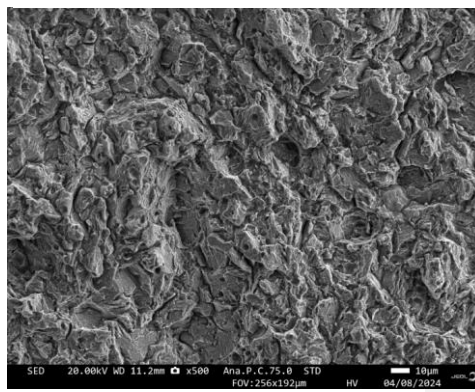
Fracture surface bolt A near center, possible intergranular.
